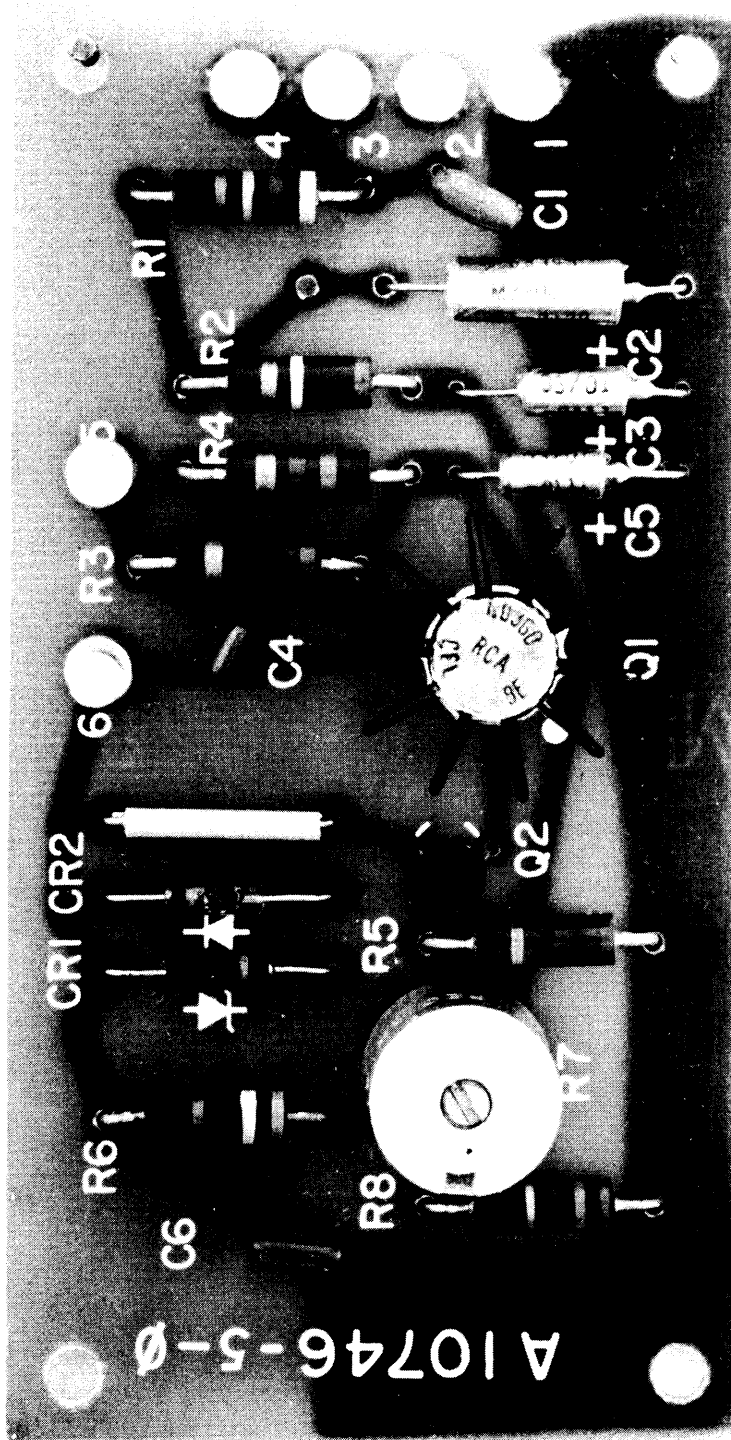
POWER SUPPLY (REGULATOR) ASSEMBLY 1A1
